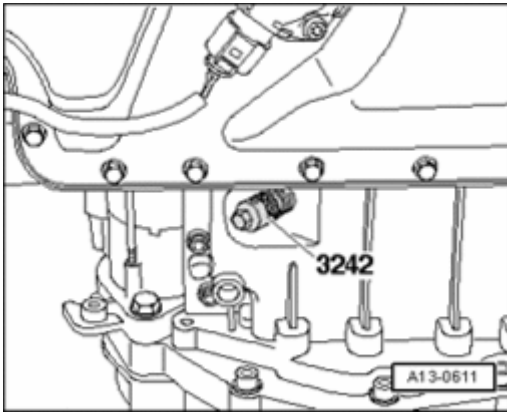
Securing Crankshaft In TDC Position Using Crankshaft Holder 3242
